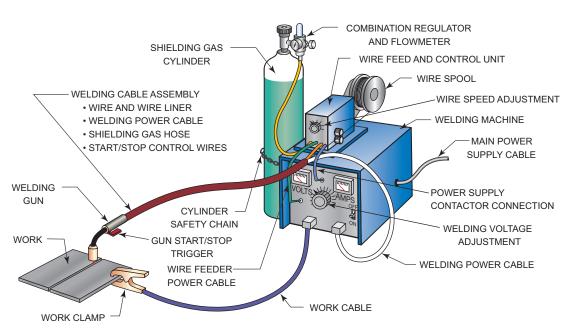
Gas metal arc welding equipment.
